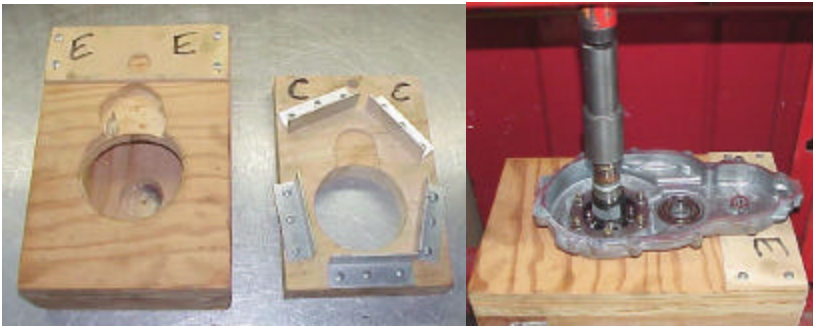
& #11 – Shows both “C” and “E” custom fixtures need to support the housing during propshaft removal. If not properly supported the housing will break under the pressures needed to remove the propshaft.
